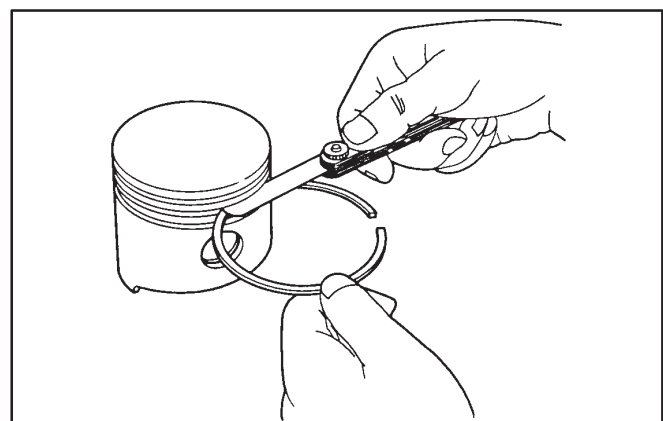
MEASURING RING GROOVE CLEARANCE
